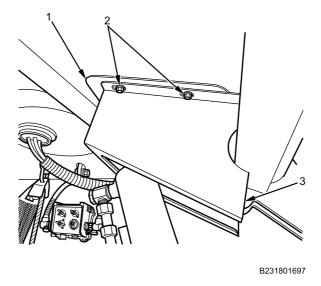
Right Side Shroud Cover Installed on Roof-Mounted Bracket.
